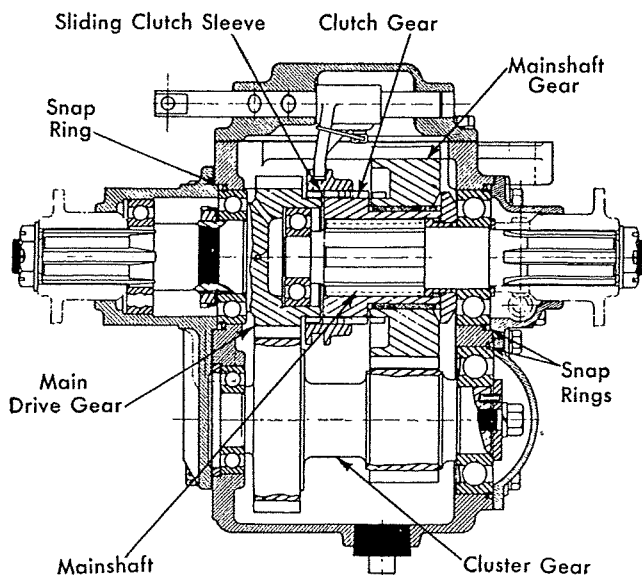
Group No. 61—Brown-Lipe 3221, 3222
